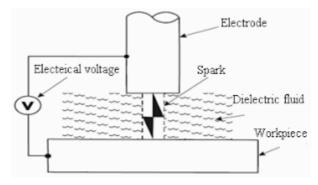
C Die-Sinking Electrical Discharge Machining
